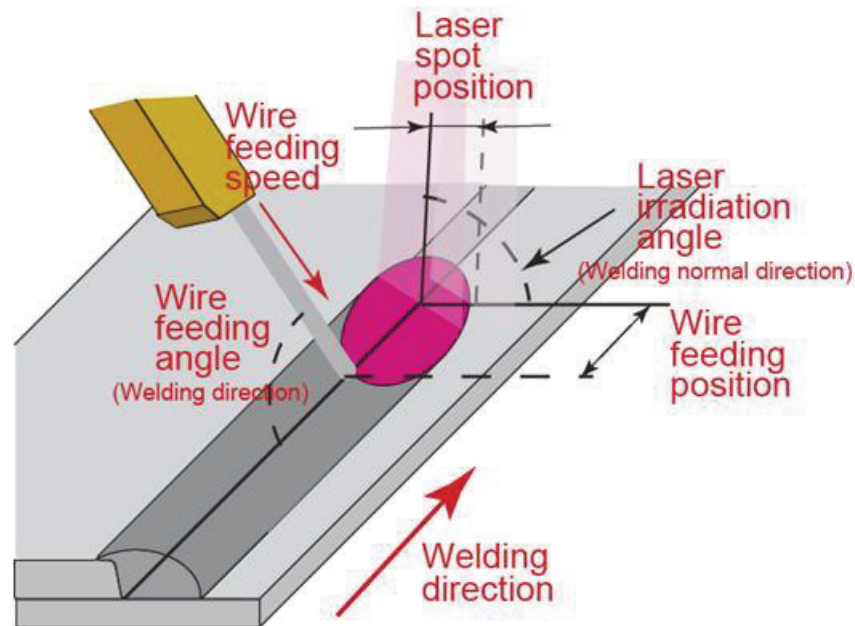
Schematic illustration Hot-wire Laser welding method.
